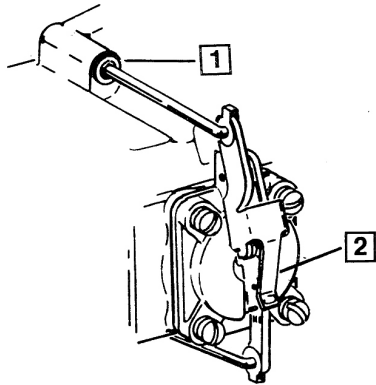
CHOKE VALVE PULL-DOWN ADJUSTMENT (Manual Choke)
